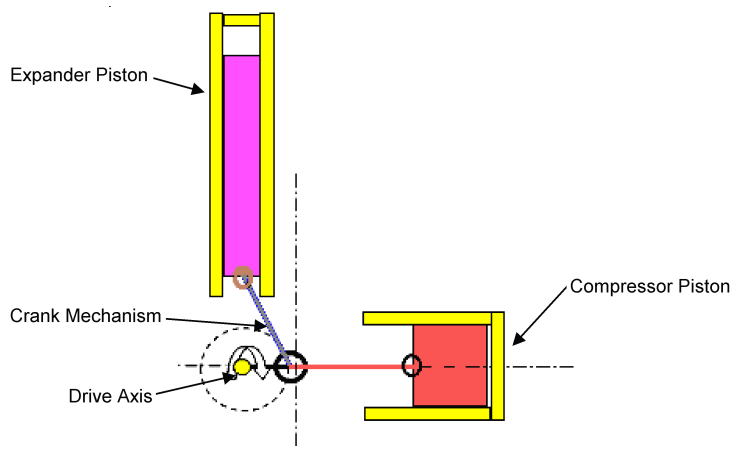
Rotary Stirling cycle cooler crank drive mechanism.
